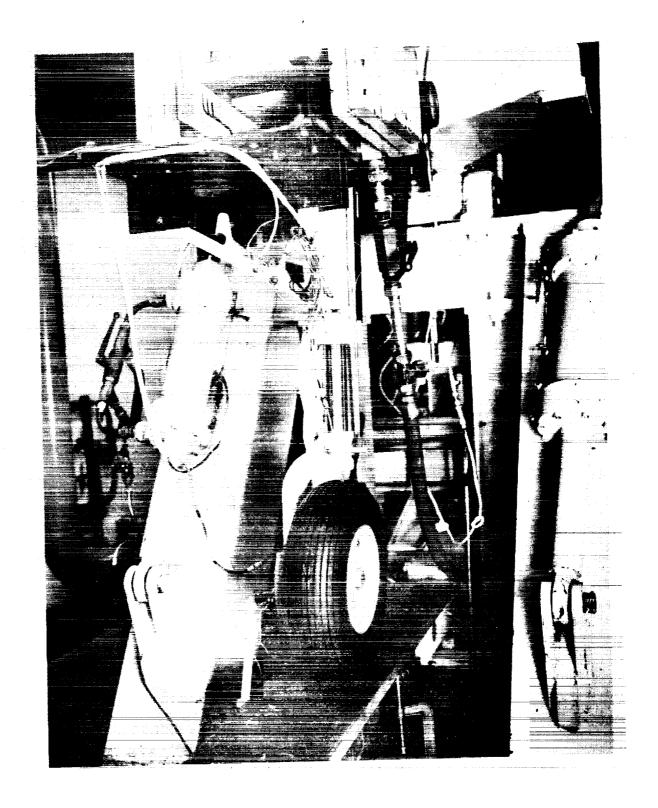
S-1C Test Fixture, Landing Gear Installed (View 1)
